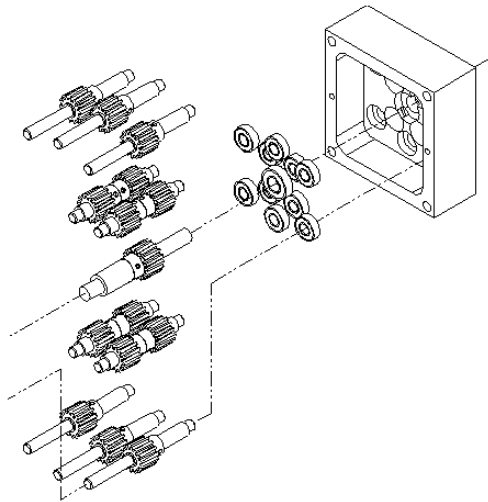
Making sure that all of the roll pins are placed properly in to the shafts set the shafts in to the bearings from the step above.
